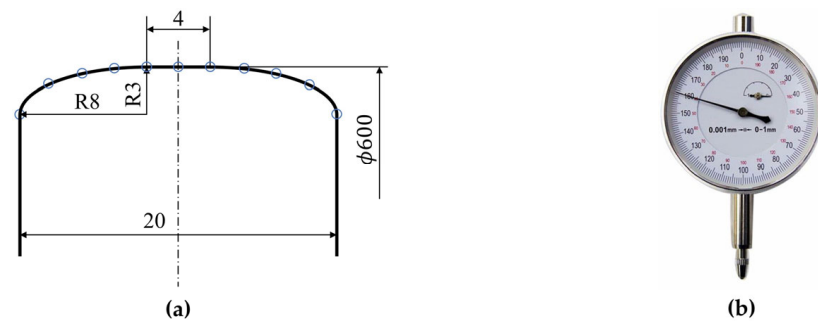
The machining tolerance test of the roller's surface profile near the wheel–roller contact patches. (a) The test points; (b) a dial gauge for checking the machining tolerances.
